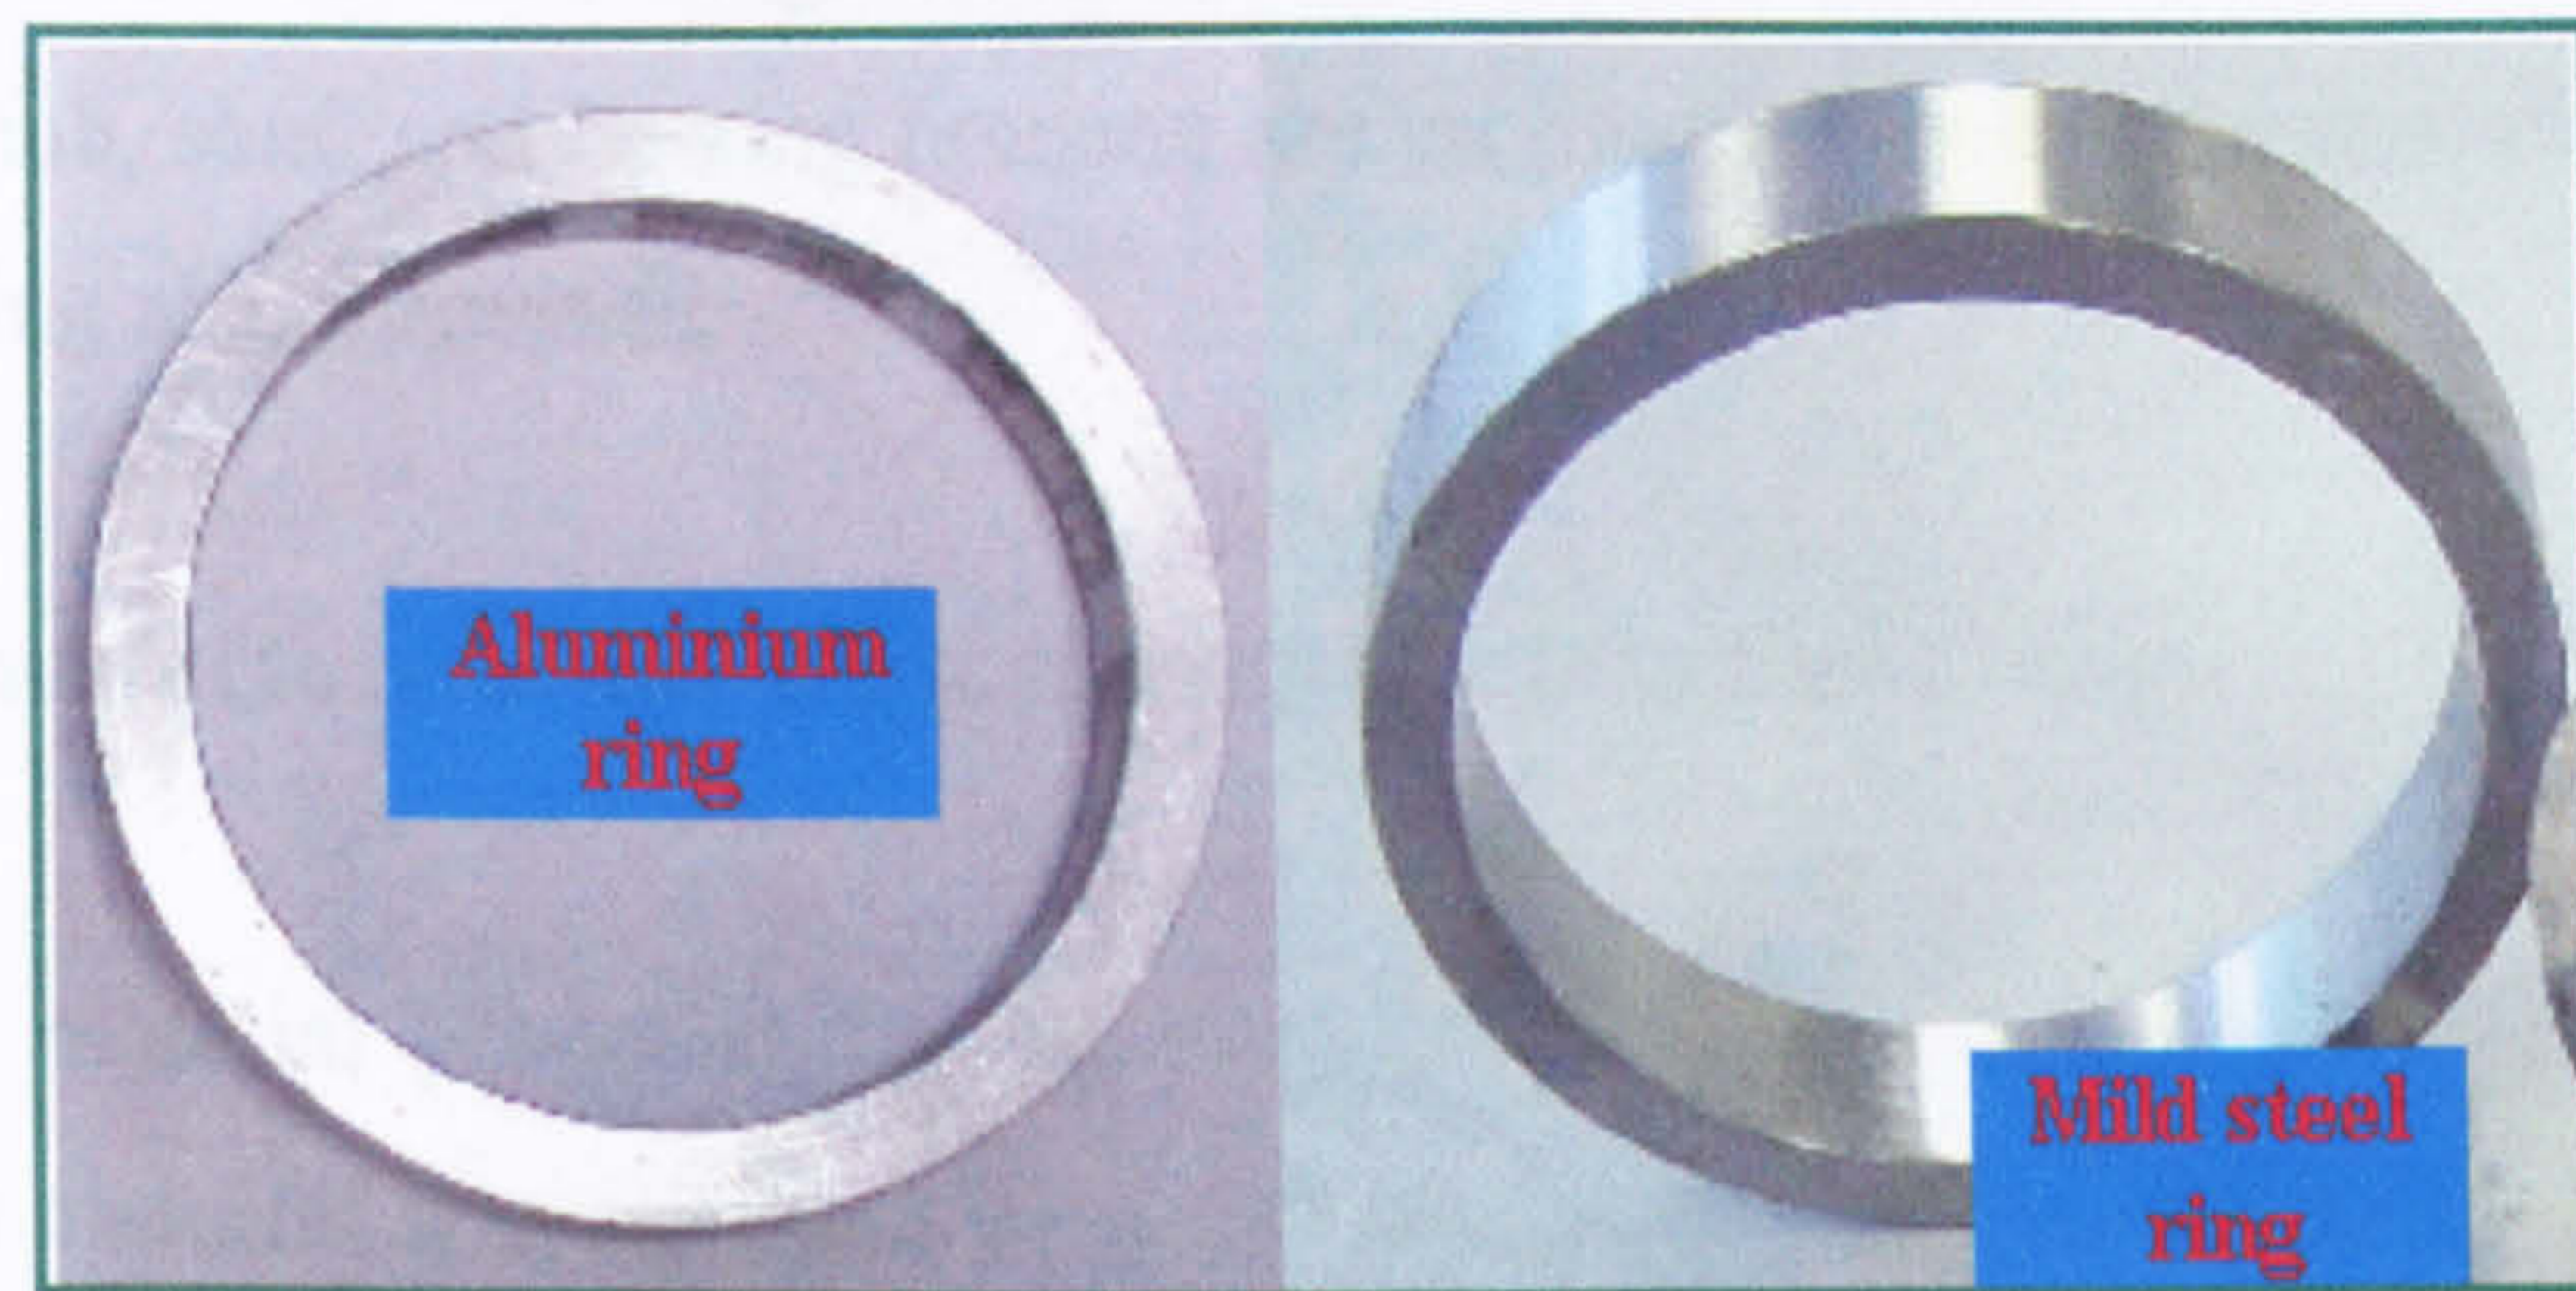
Retainment rings of aluminium and mild steel used for preliminary prototype
